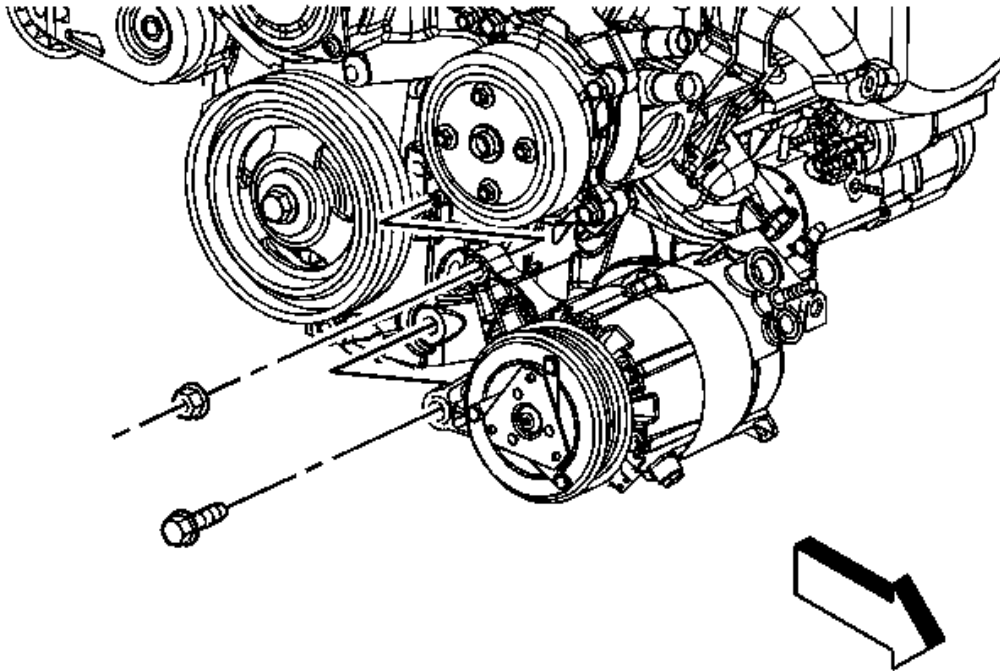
View Of Air Conditioning (A/C) Compressor Front Bolt/Nut
